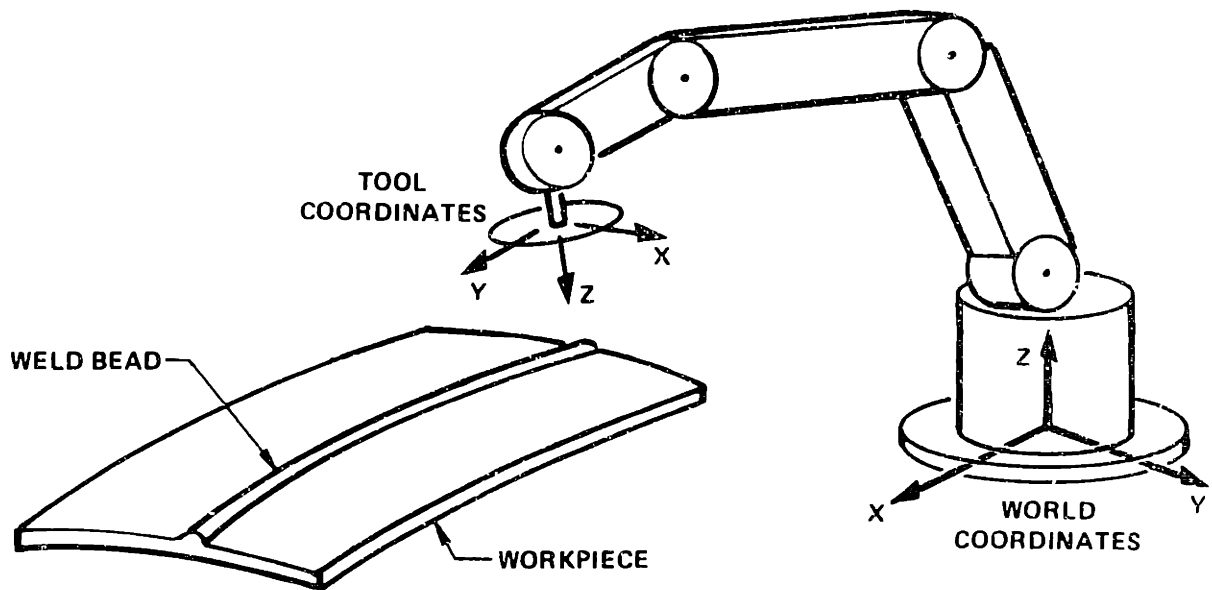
Conceptual arrangement of robot, grinding disk, and workpiece: Tool and world coordinates illustrated
